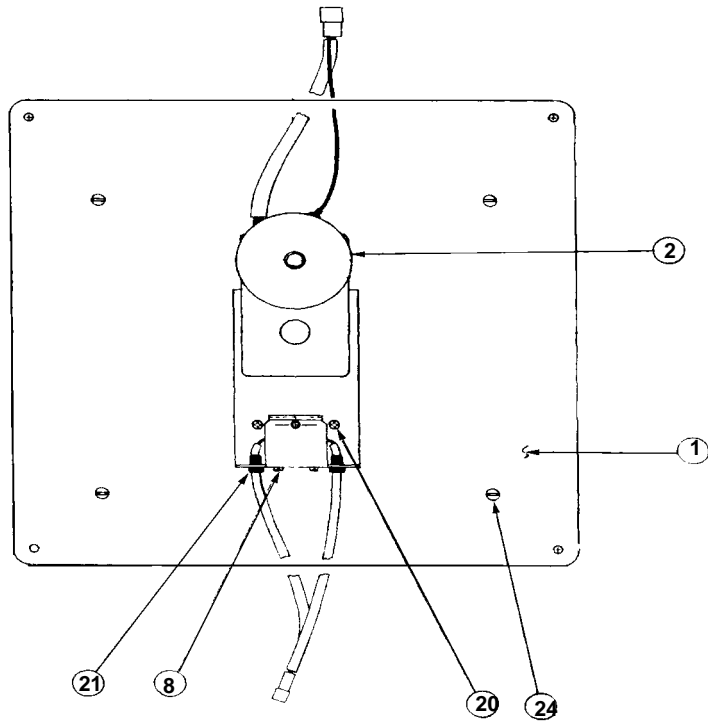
TOP VIEW ICE LEVEL CONTROL ASSEMBLY
